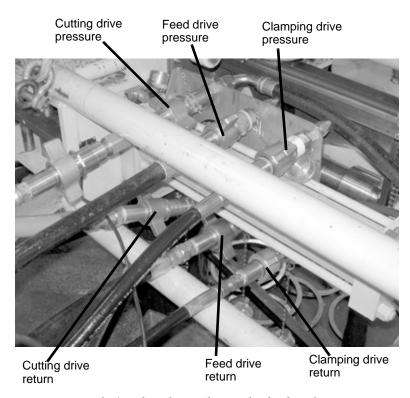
The photo shows the hydraulic connector bulkhead.
